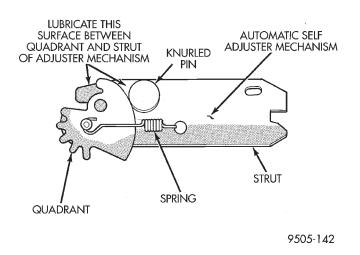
Automatic Self Adjuster Mechanism INSTALLATION
